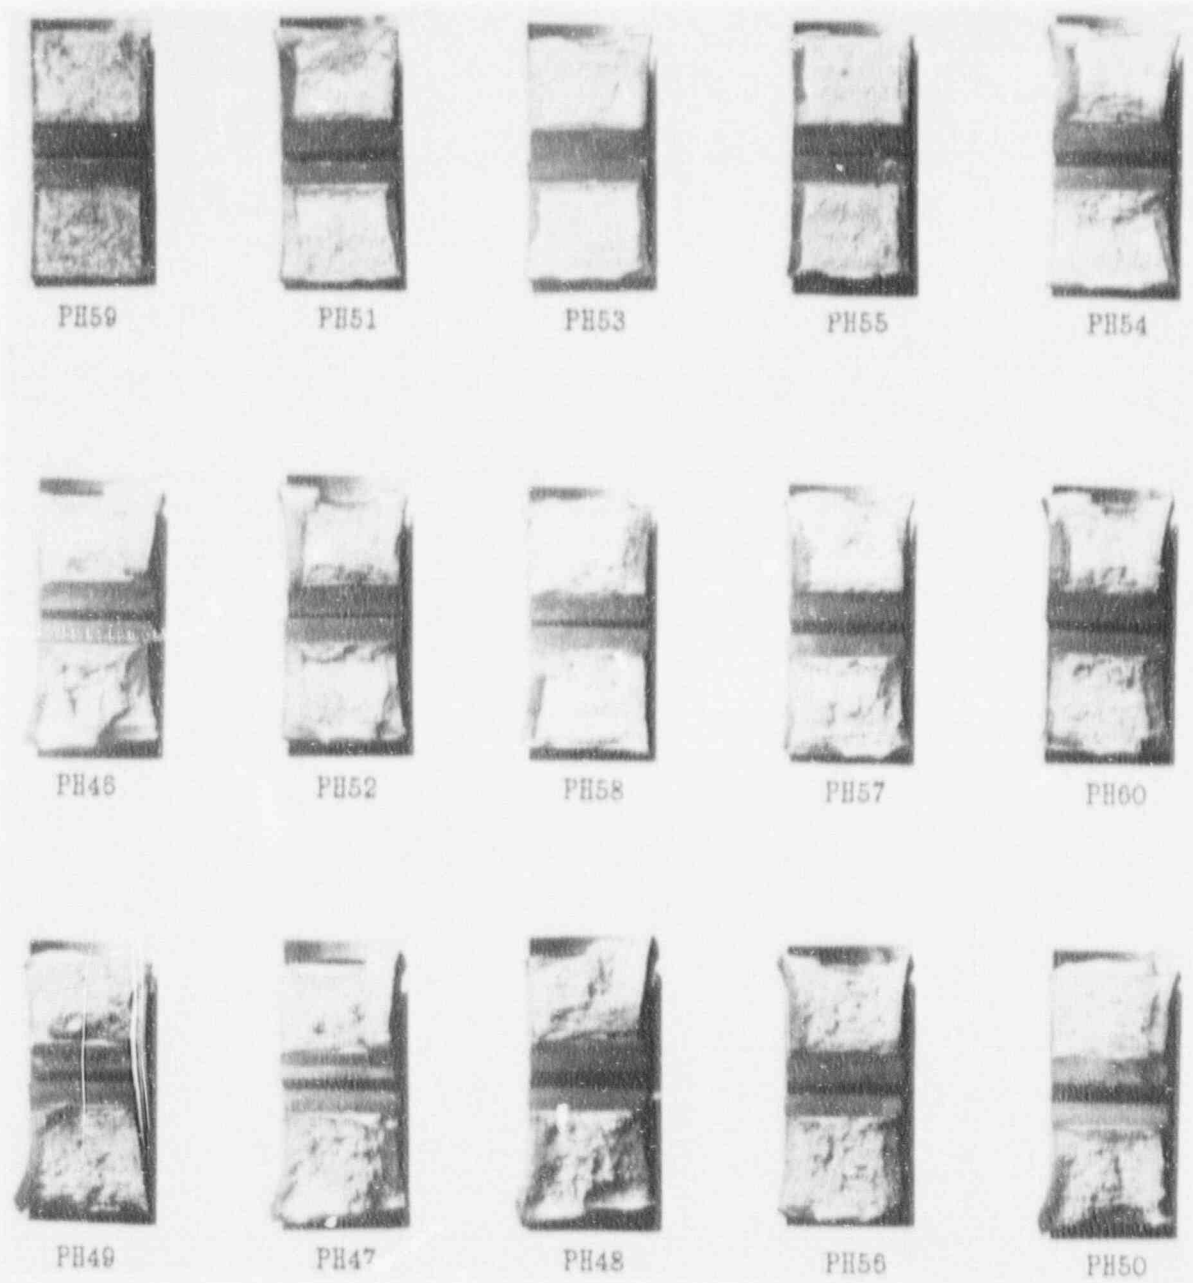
Charpy Impact Specimen Fracture Surfaces for Diablo Canyon Unit 2 Reactor Vessel Weld Heat Affected Zone (HAZ) Metal
